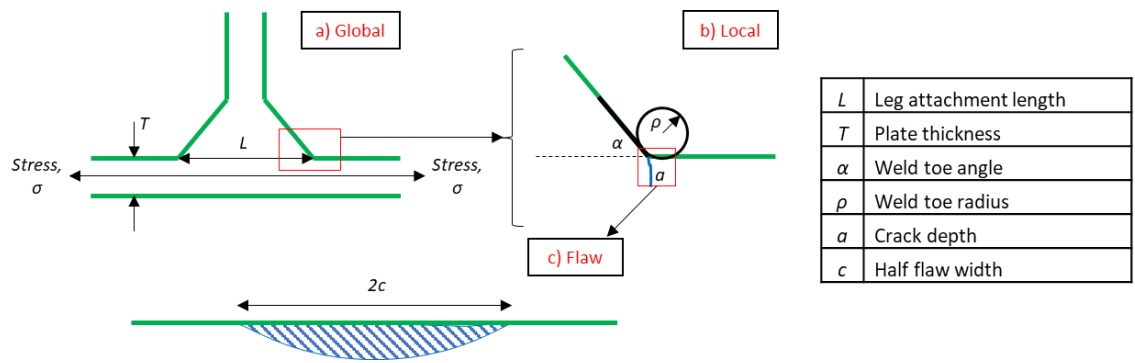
Schematic of the mathematically simplified geometry. a) Global weld toe geometry; b) Local weld toe geometry; c) Flaw at weld-toe. Adapted from [9].
